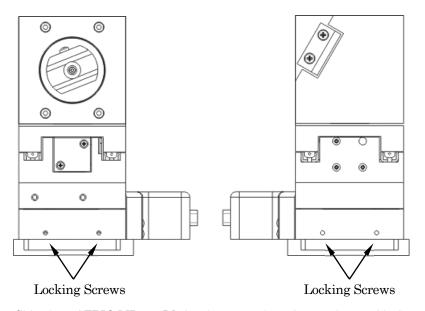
Side view of TRIO MP-245/M showing mounting adapter plate and lock screws.
